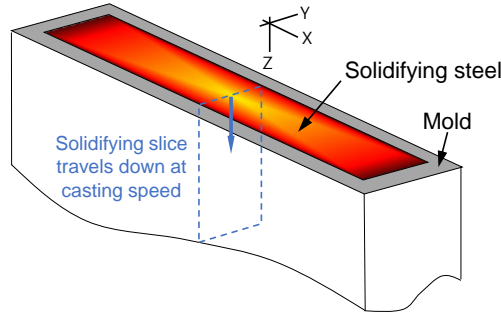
3D schematic of molten steel solidifying in a caster mold.
